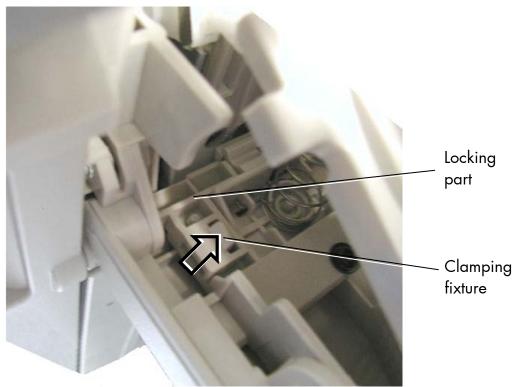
h Detail (left side): locking mechanism inside the MPT
